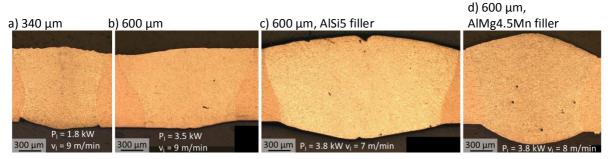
Cross sections of welded AA 6082 a) 340 μ m spot diameter, b) 600 μ m spot diameter, c) 600 μ m spot diameter and AlSi5 filler and d) 600 μ m spot diameter and AlMg4.5Mn filler
